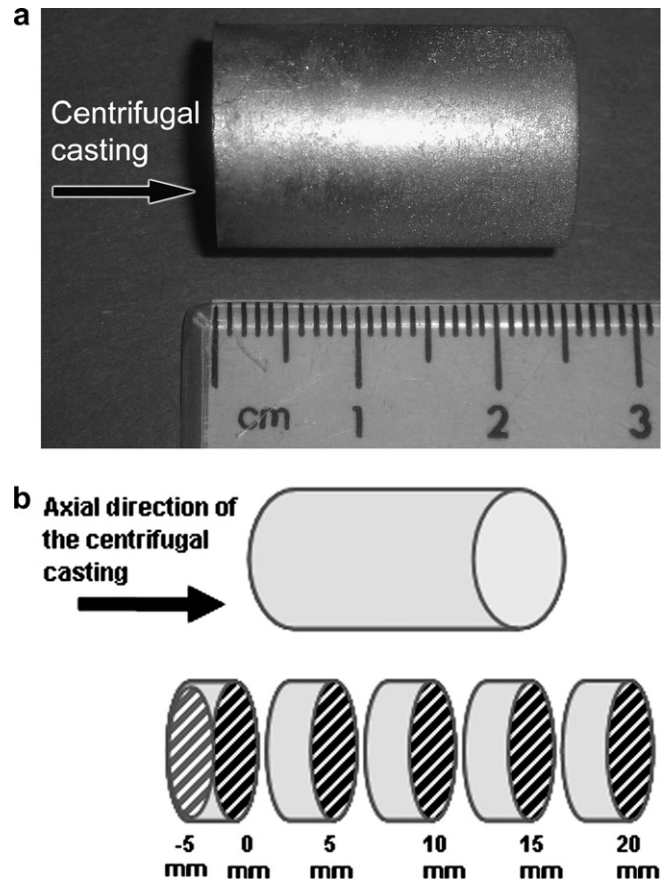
Centrifugally cast piece (a) final specimen after centrifugal casting (b) test sections on which characterization and testing were performed.
